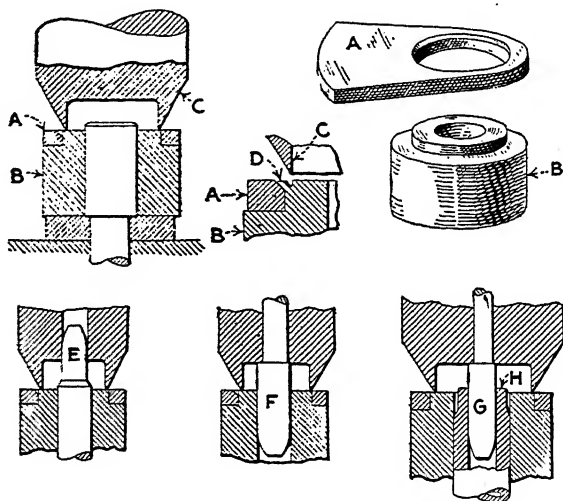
Example of Ring-Staking and Types of Ring-Staking Tools
